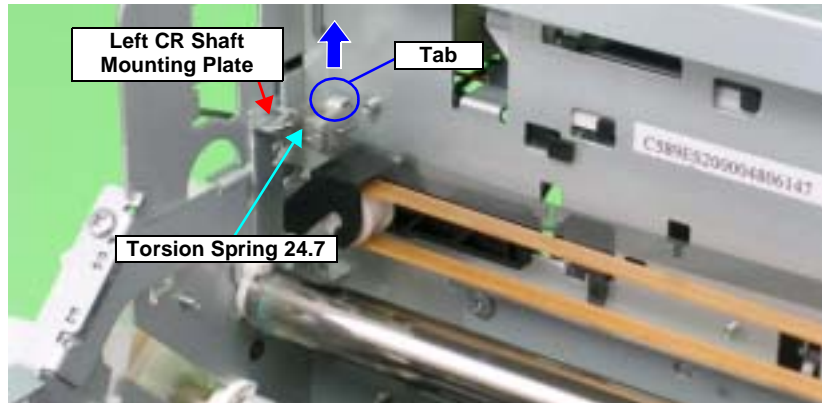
Removing the Torsion Spring 24.7 (1)
